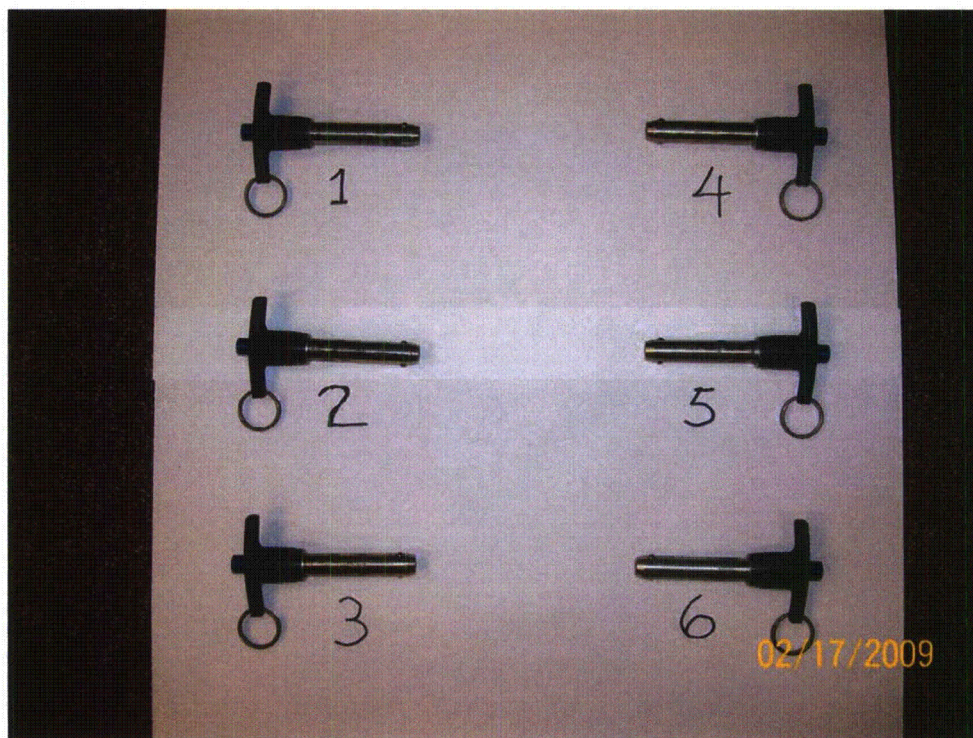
Primary Impact Limiter Attachment Ball Lock Pins, Post-test
